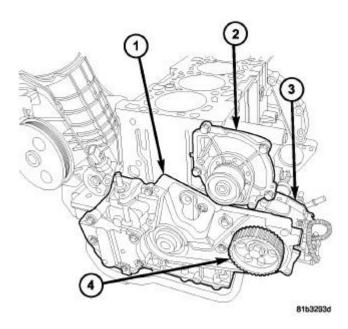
OIL PUMP COVER ASSEMBLY Courtesy of CHRYSLER LLC
